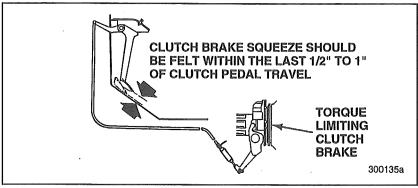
Clutch Brake Squeeze (Spicer Easy Pedal)
